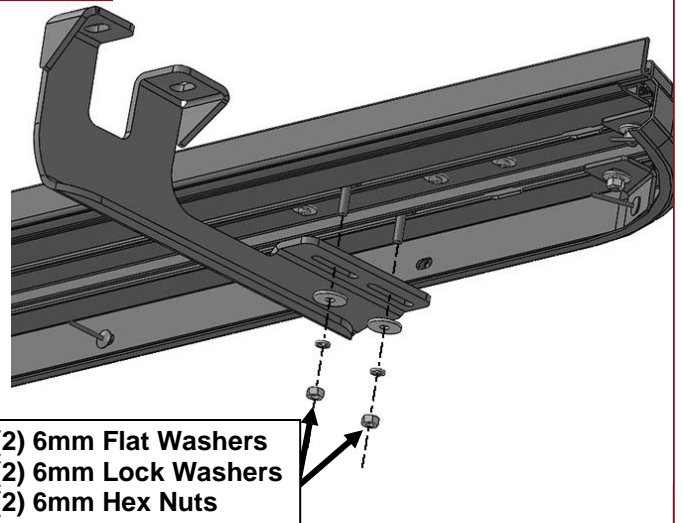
Insert (6) T-Bolts into the bottom of the Running Board, (3) per channel
